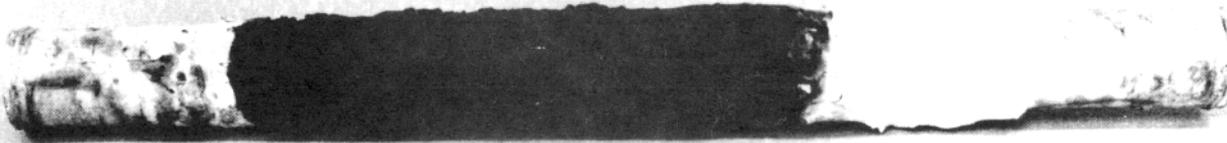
TYPICAL OCEAN 1-112D COATED ALUMINUM TUBE AFTER TEST IN DRY BAY FIXTURE
